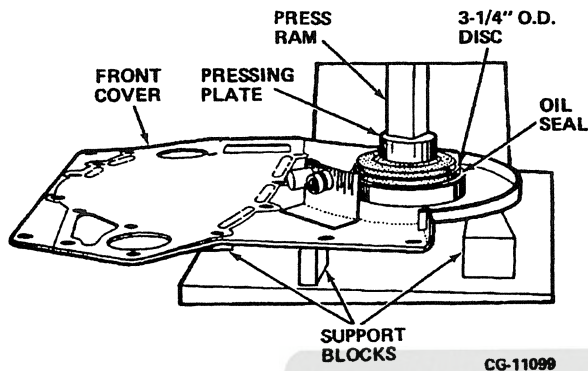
Front Cover Oil Seal Removal with Cover Removed Using 3-1/4" O.D. Disc
